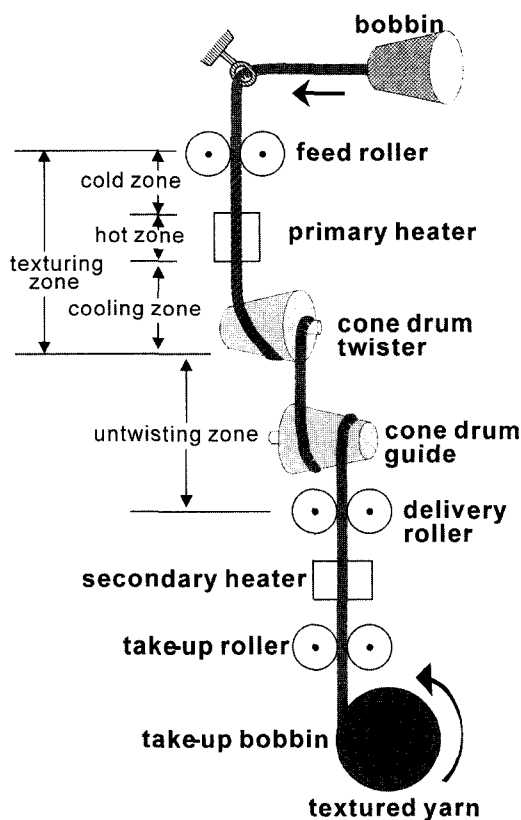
Schematic diagram of the cone drum type draw texturing machine.
